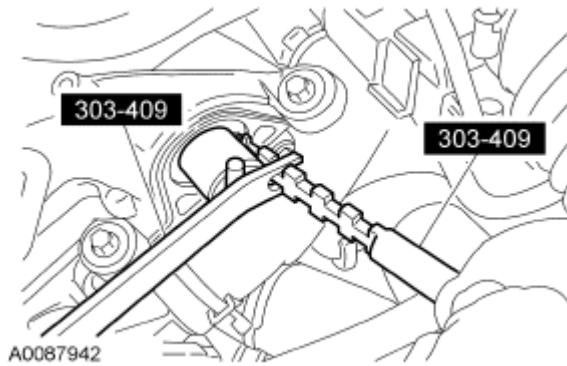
Removing Camshaft Oil Seal Using Special Tool (303-409)
